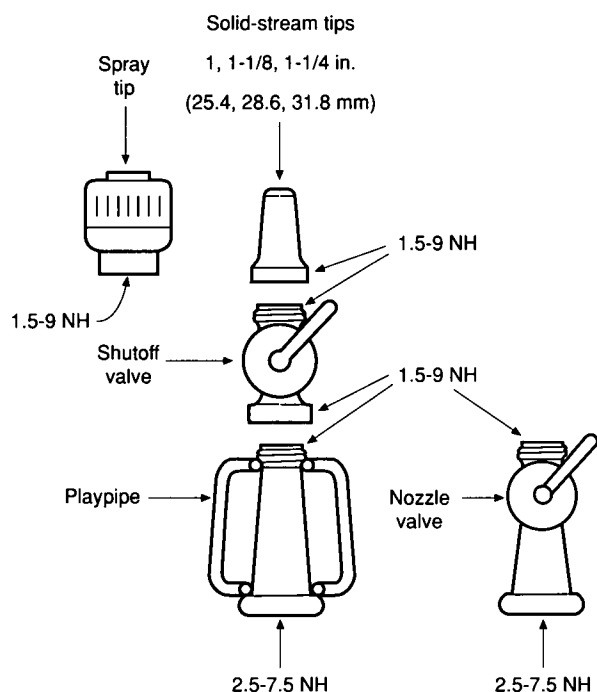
Nozzle assembly for 2½-in. (65-mm) hose.
